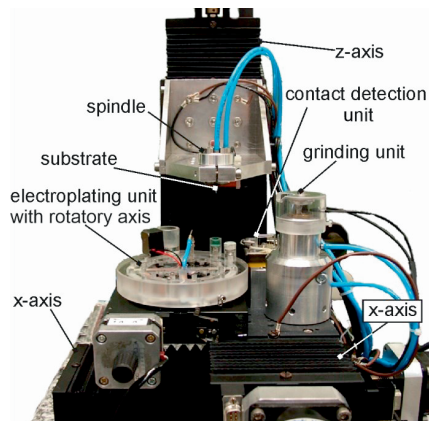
Electroplating unit by ENGMANN [Engm11]
